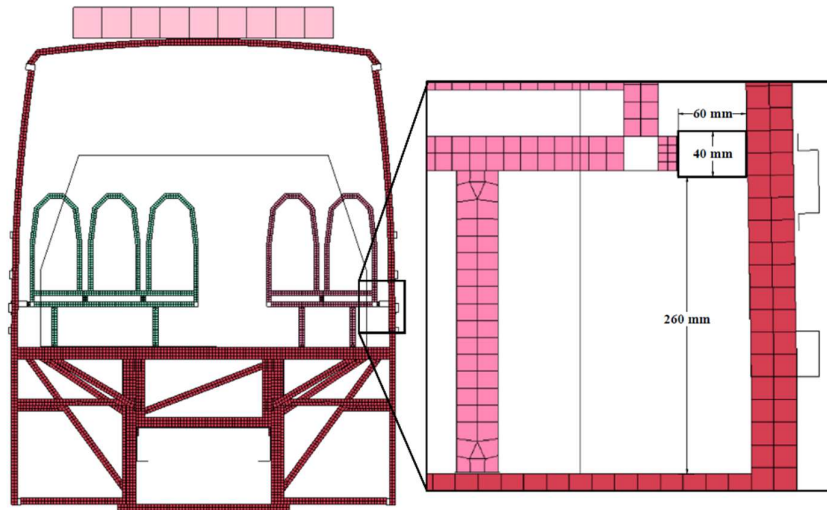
Illustration of seat structure to side pillar connection reinforcement.
